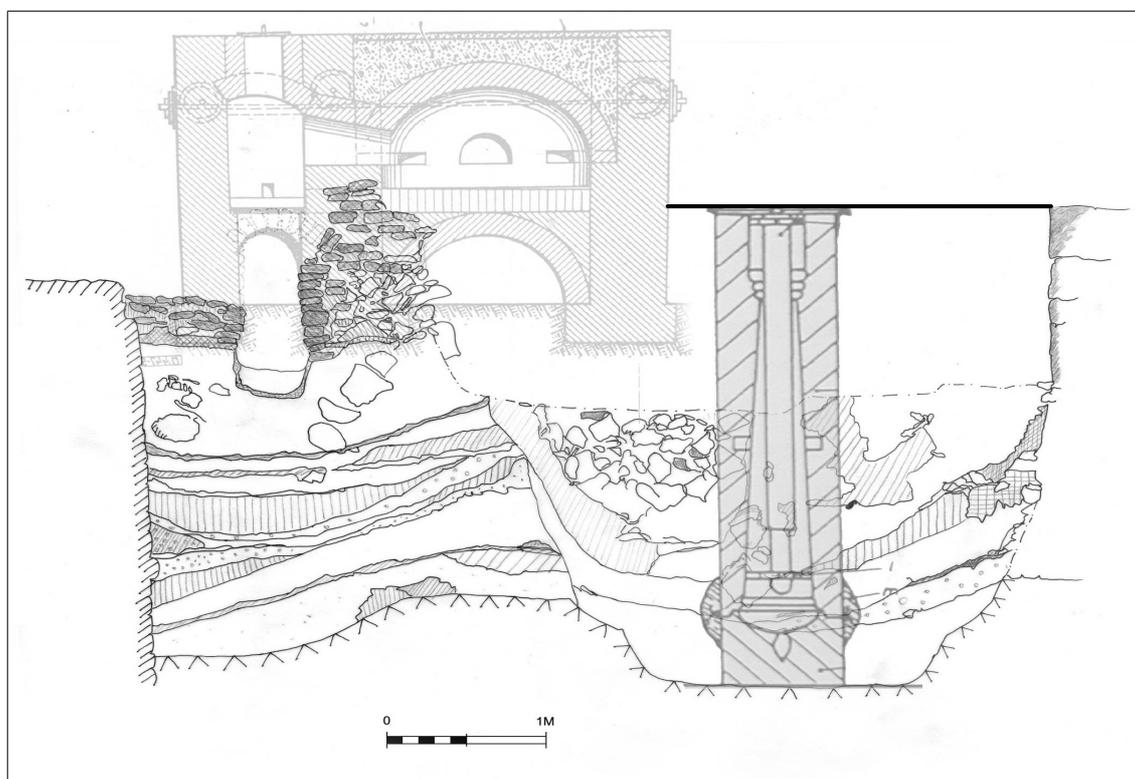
Reconstructed flame furnace nr. II with the illustration of the casting form of a cannon.
